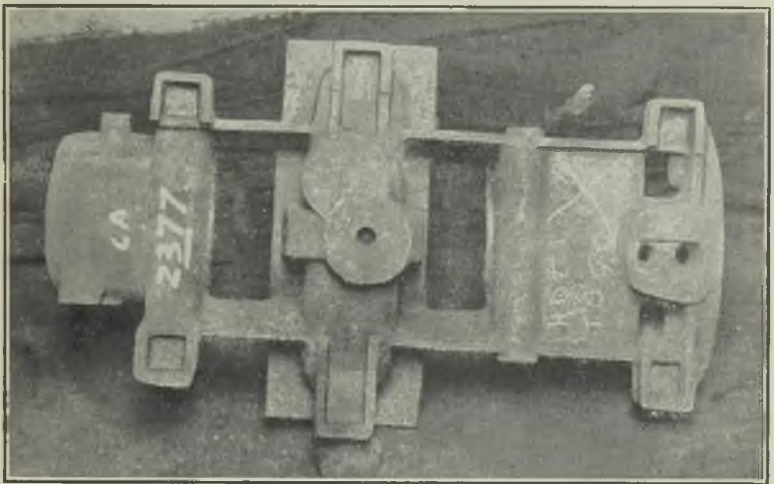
HORIZONTAL TURBINE-PUMP FRAME.
